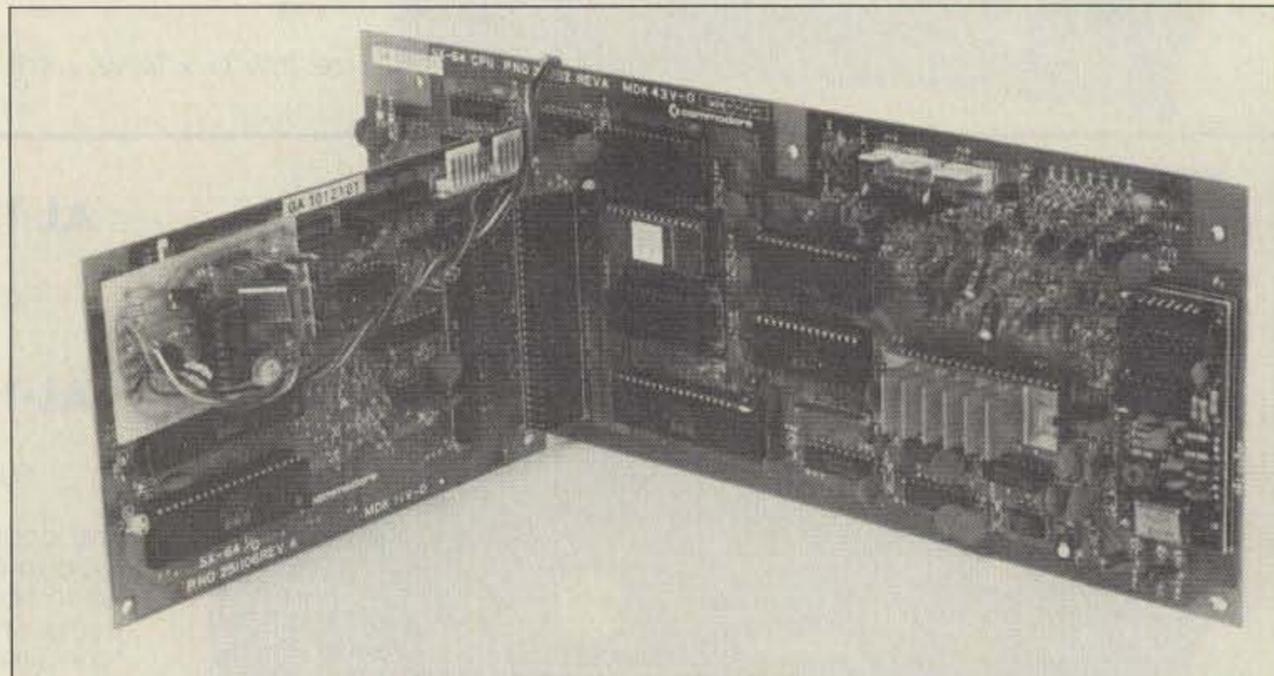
Photo C. Here's the modified N4PLK modem mounted to the SX-64's CPU and I/O boards via a circuit board standoff (upper left corner of I/O board). Connections from modem to transceiver are made by using the external serial port pin socket, cable, and DIN connector.
